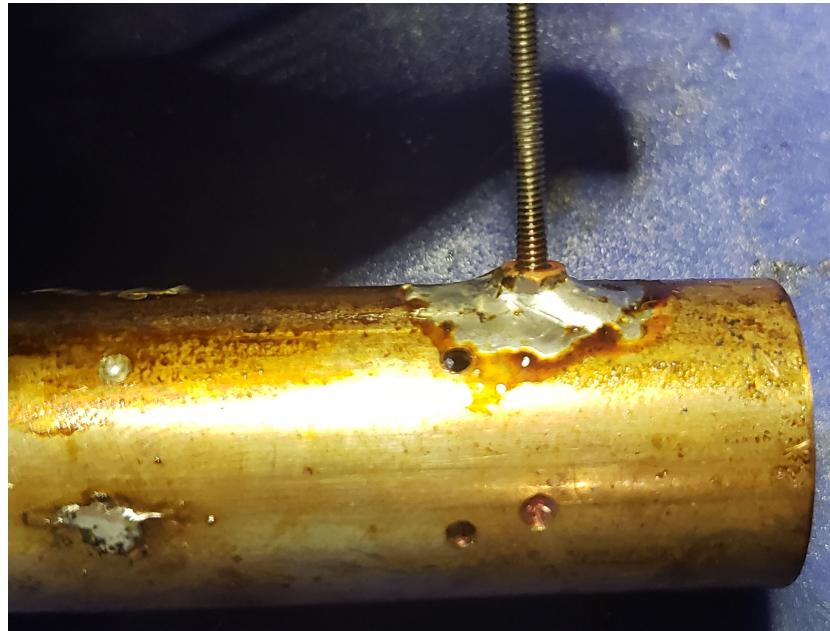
Brass nut soldered to tube using stainless steel bolt as aid.
